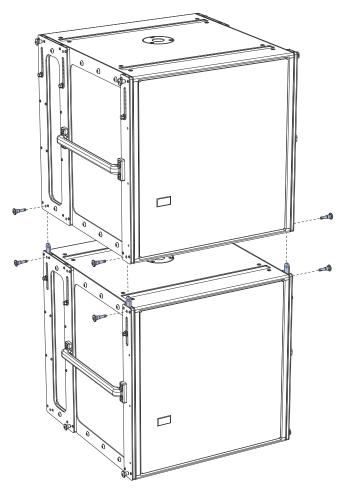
Ultra Reflex LF-18 with MRK-900-LFC Rigging Kit, GuideALinks, Exploded View
